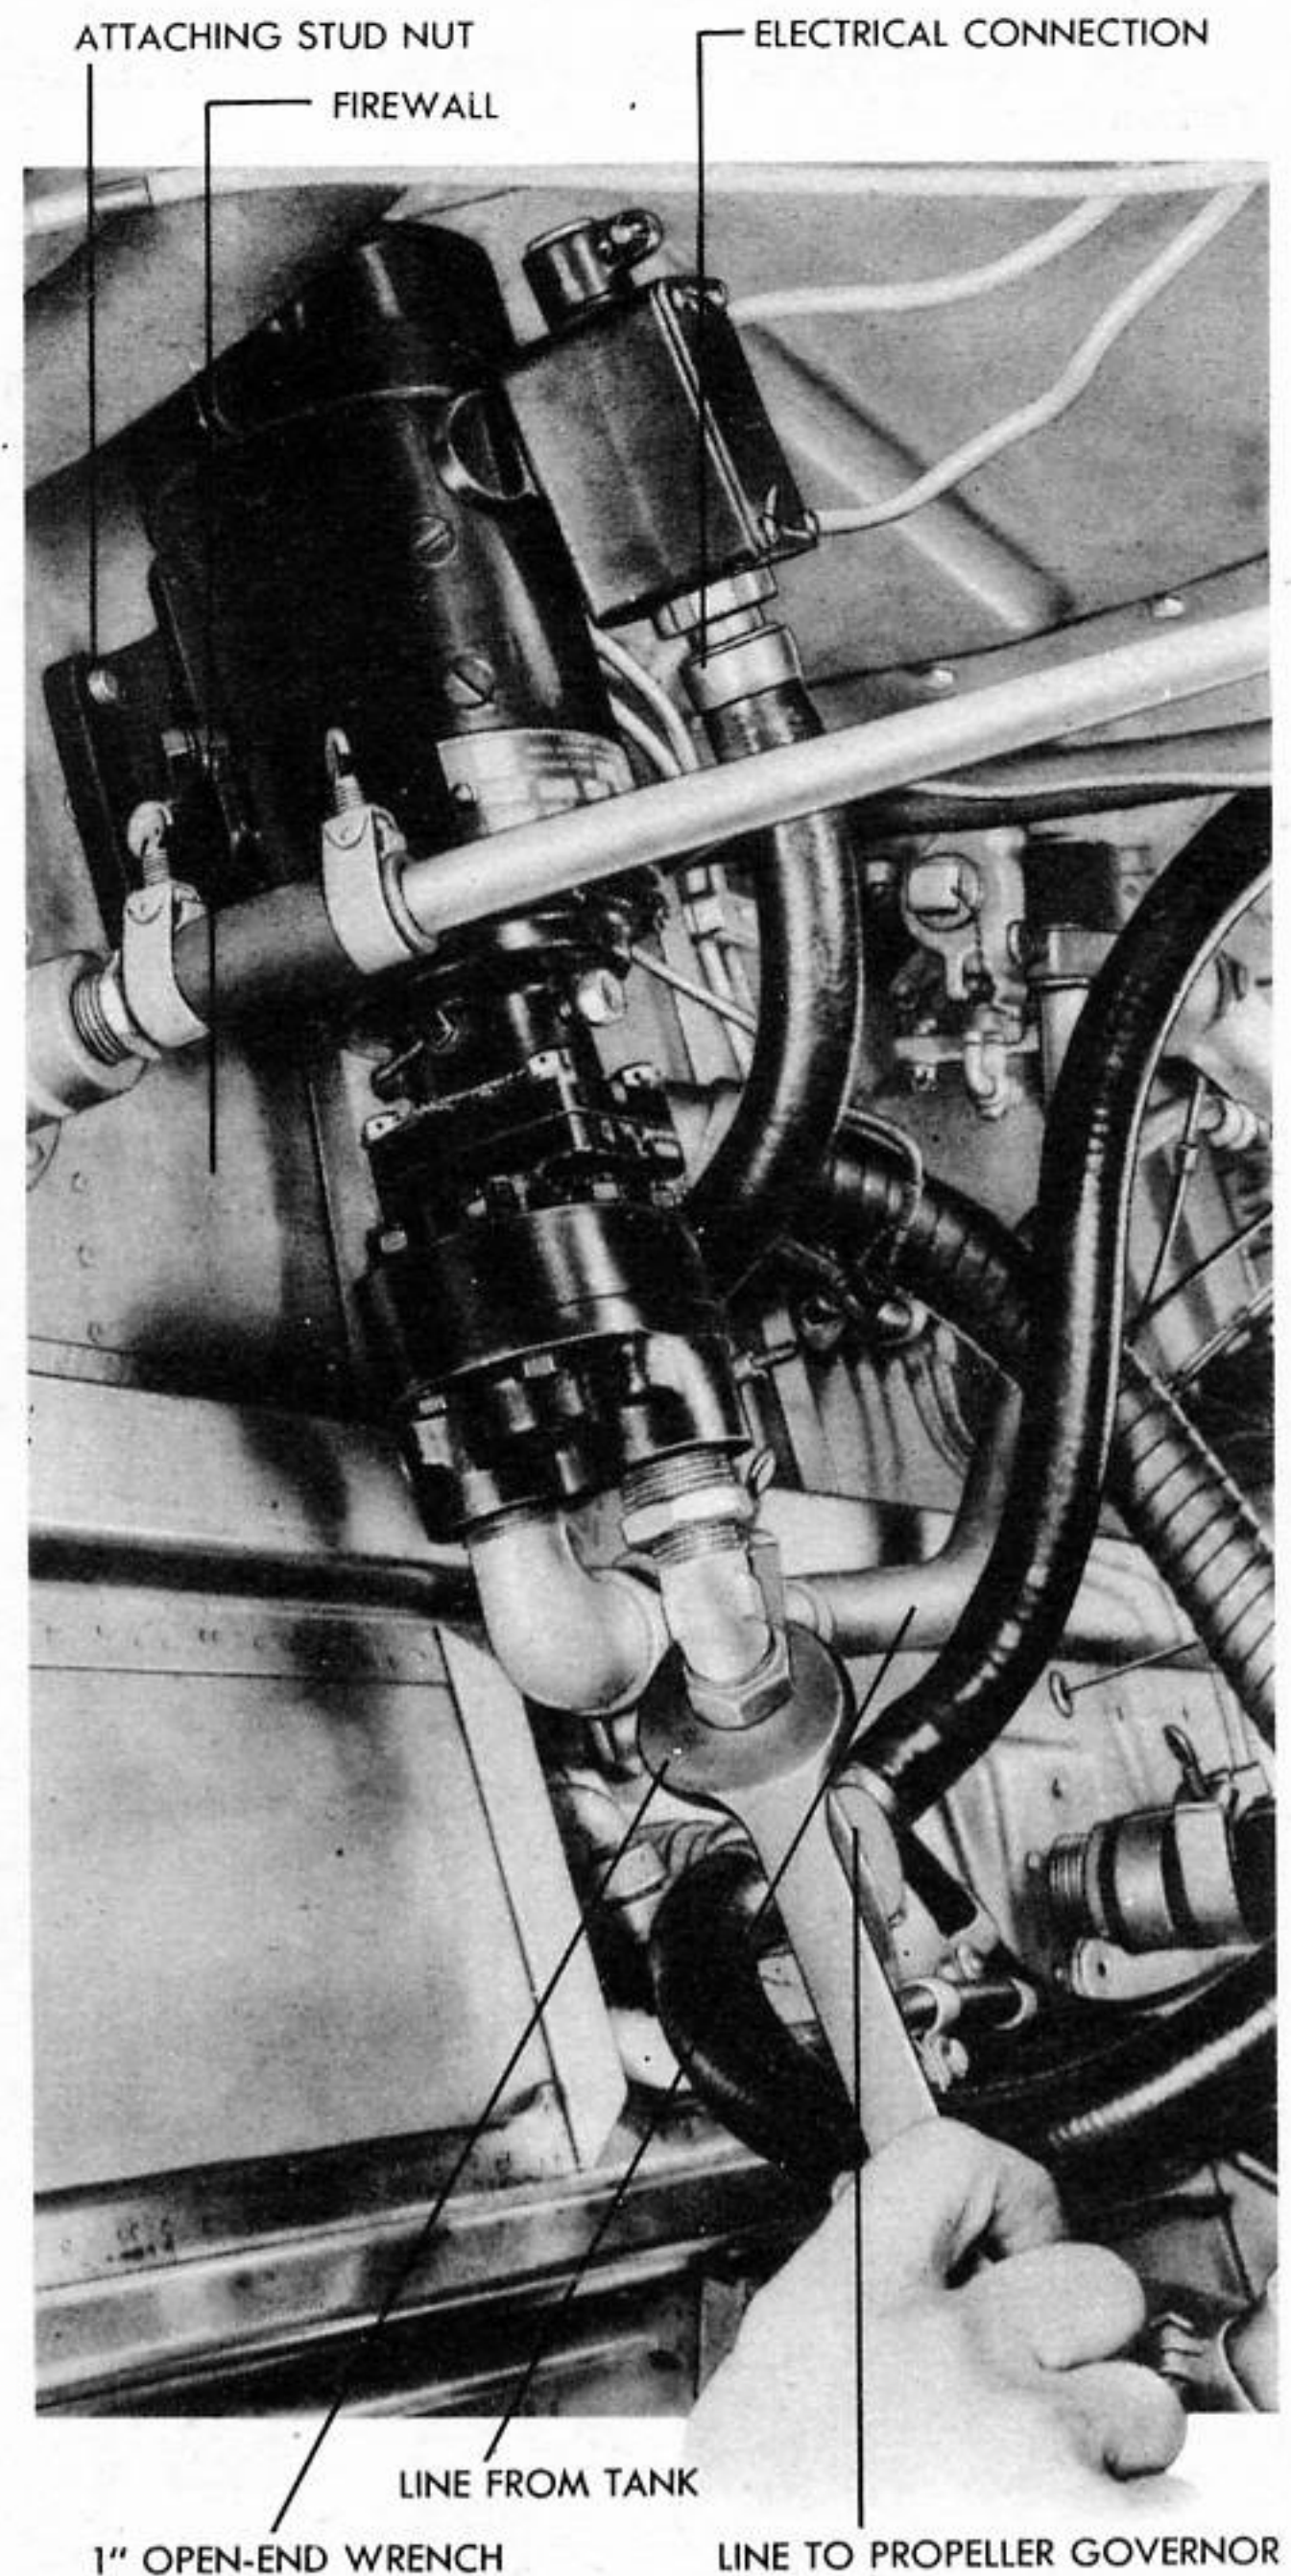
REMOVING PROPELLER FEATHERING PUMP
